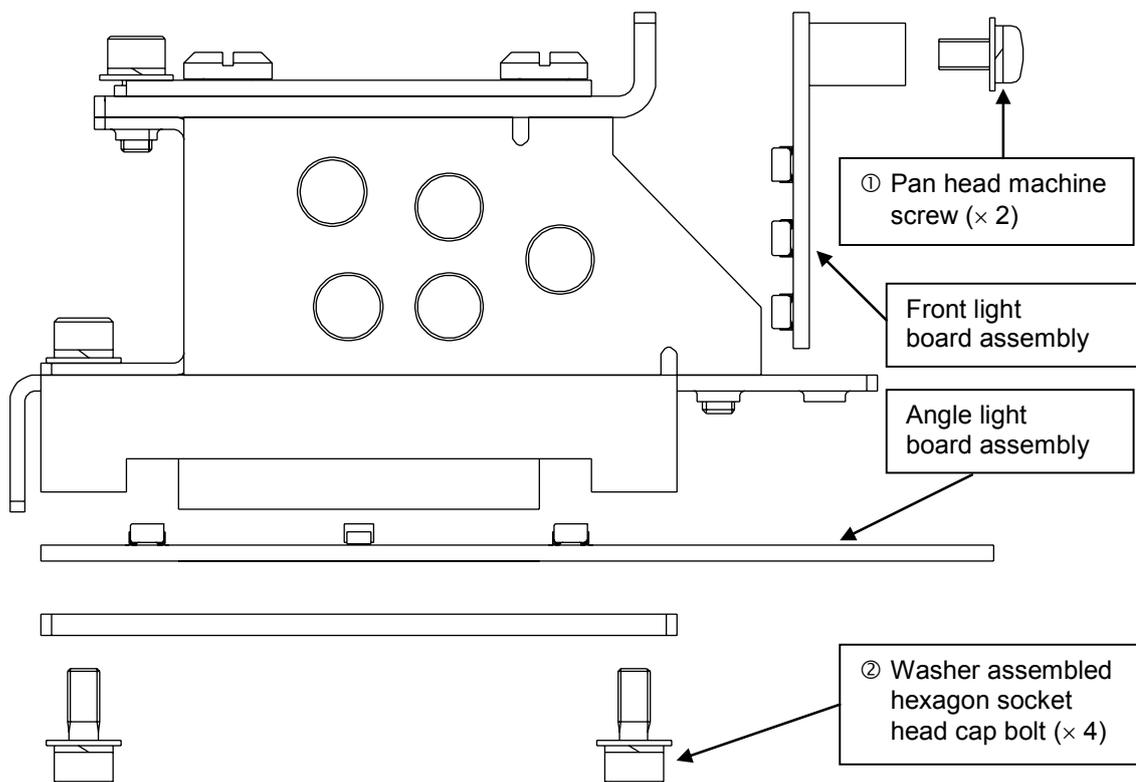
Replacing the OCC Front/Angle Light Board Assembly
